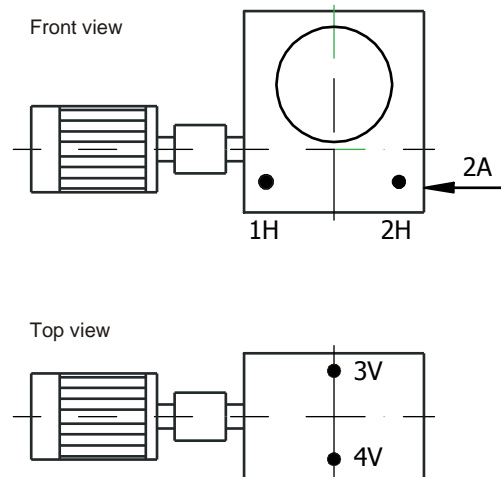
The scheme of the placing of the sensors on the surface of worm gearboxes
